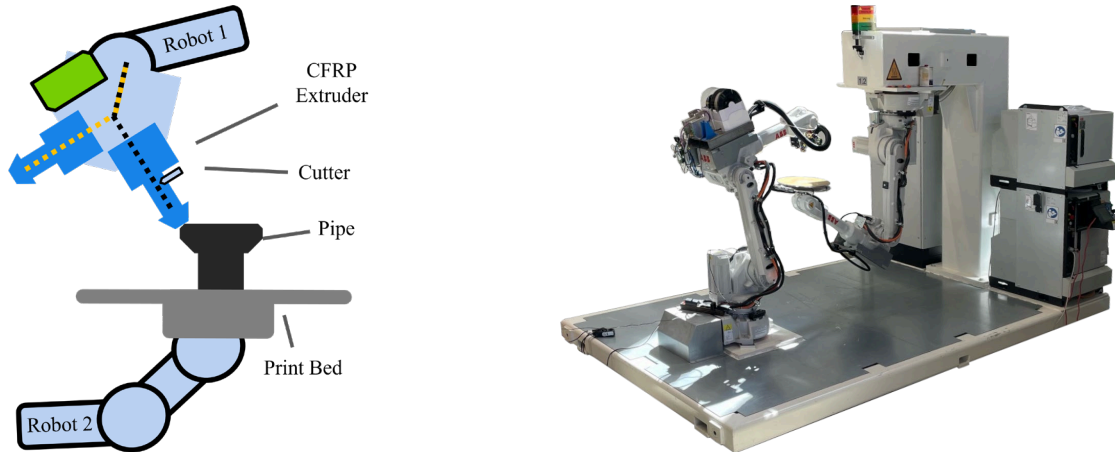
Left: Schematic representation of the experimental setup with labelled components relevant for radial 3D printing. Right: Dual-robot-based experimental setup employed in this work.
